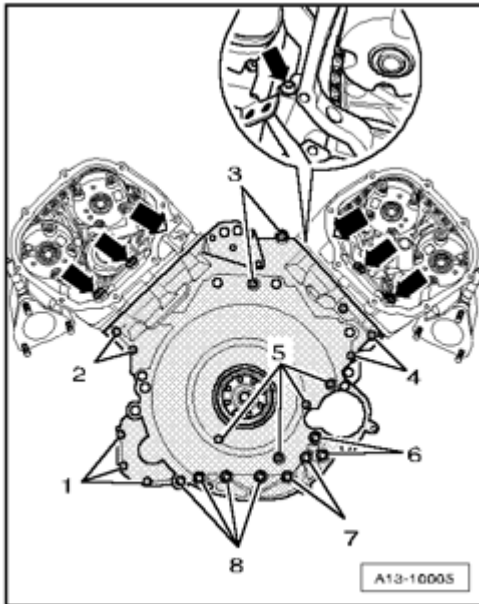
Removing/Installing Bolts And Lower Timing Chain Cover
